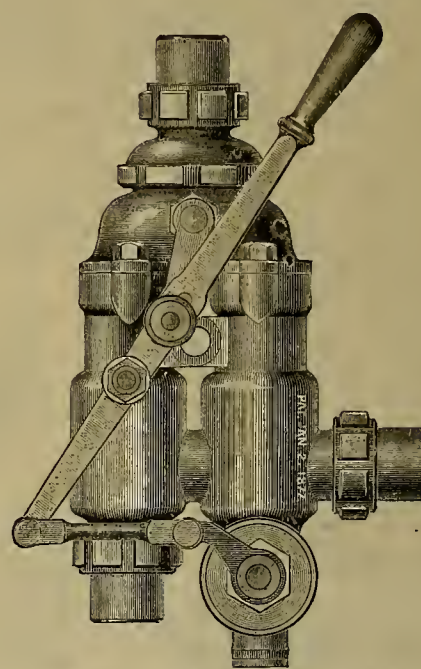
INSPIRATOR FOR LOCOMOTIVE BOILER.
